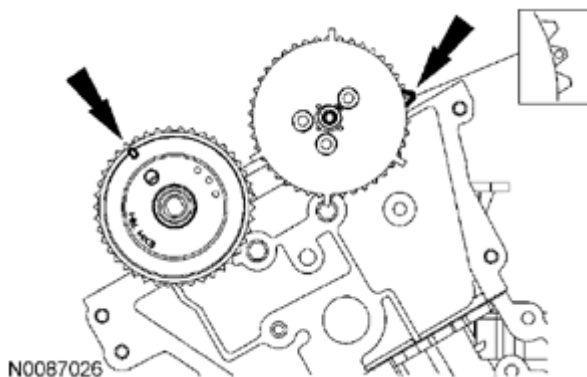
Identifying RH Camshafts Are In Neutral Position
